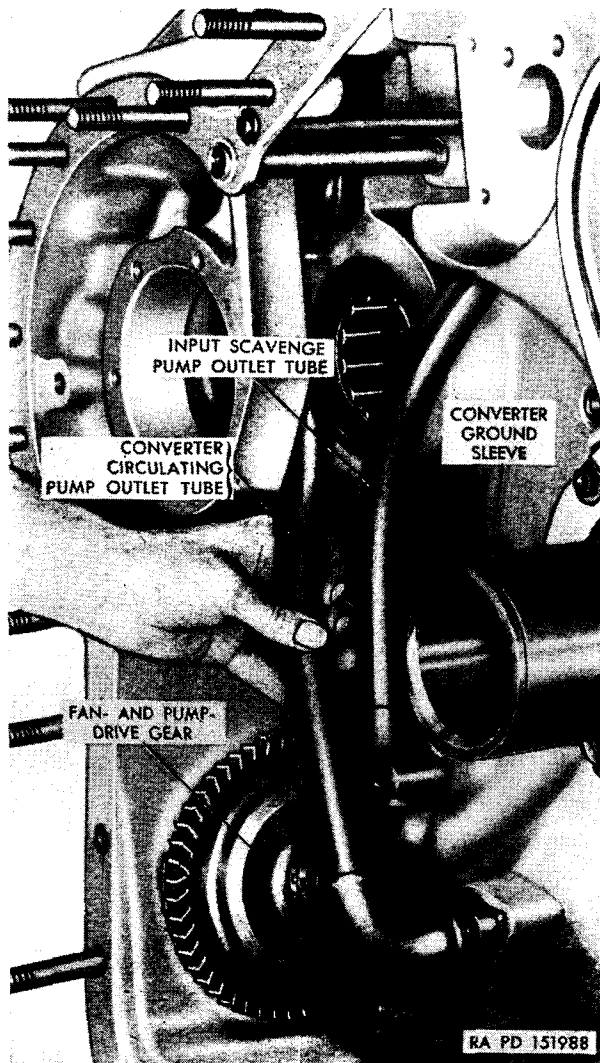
Removing or installing converter-circulating-pump-outlet tube.
